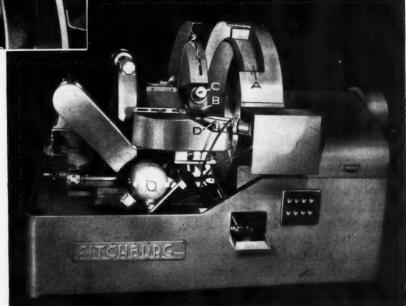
(Above) General View of a Consta-Contac Grinding Machine Set up for Finishing Automotiveengine Valves
